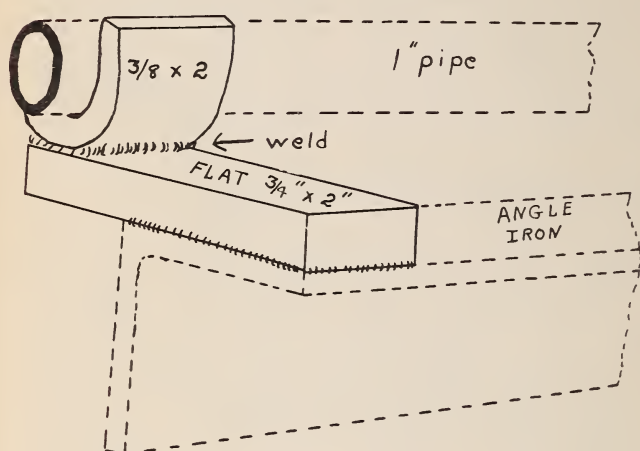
U-shaped mount for supporting horizontal bar of hood for tilting.
